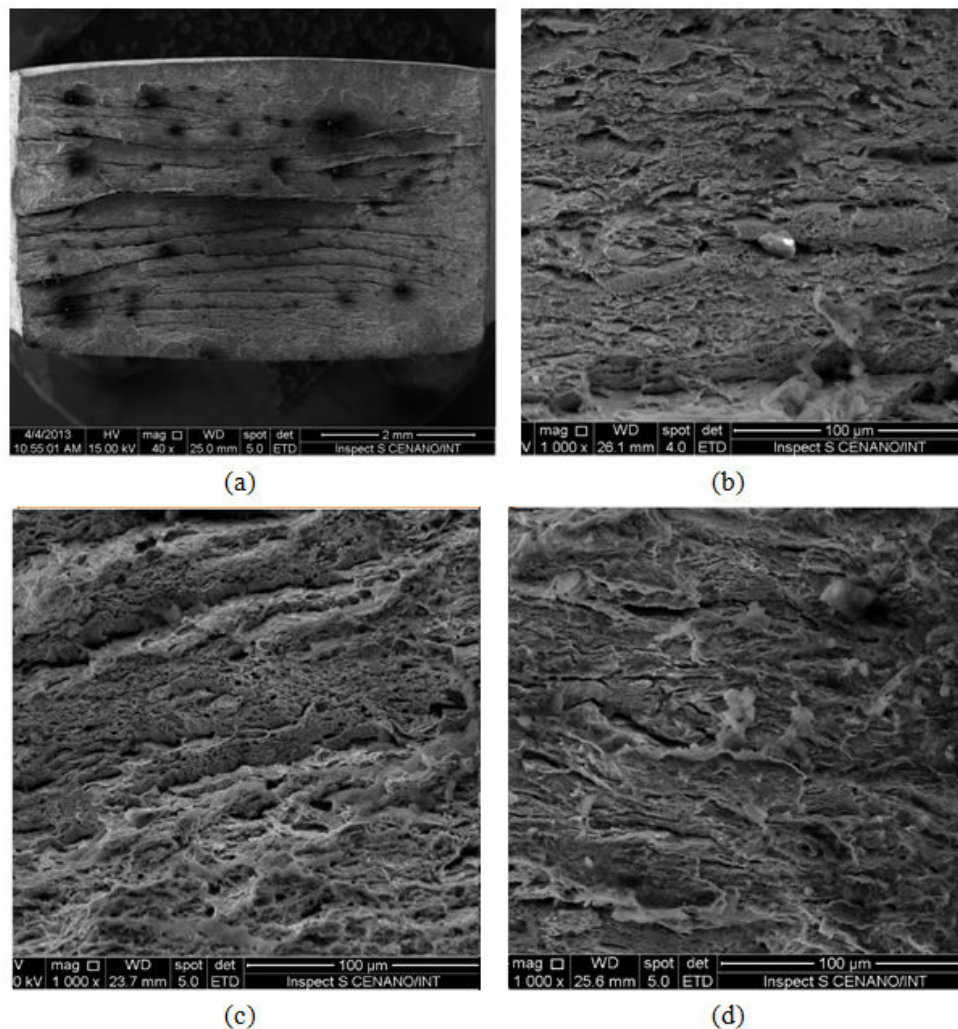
Fractography of the specimens after testing in media C (high concentration of H_2S). (a) Macroscopic appearance, (b) Fractography from central region, (c) and (d) Fractography from edge region.
